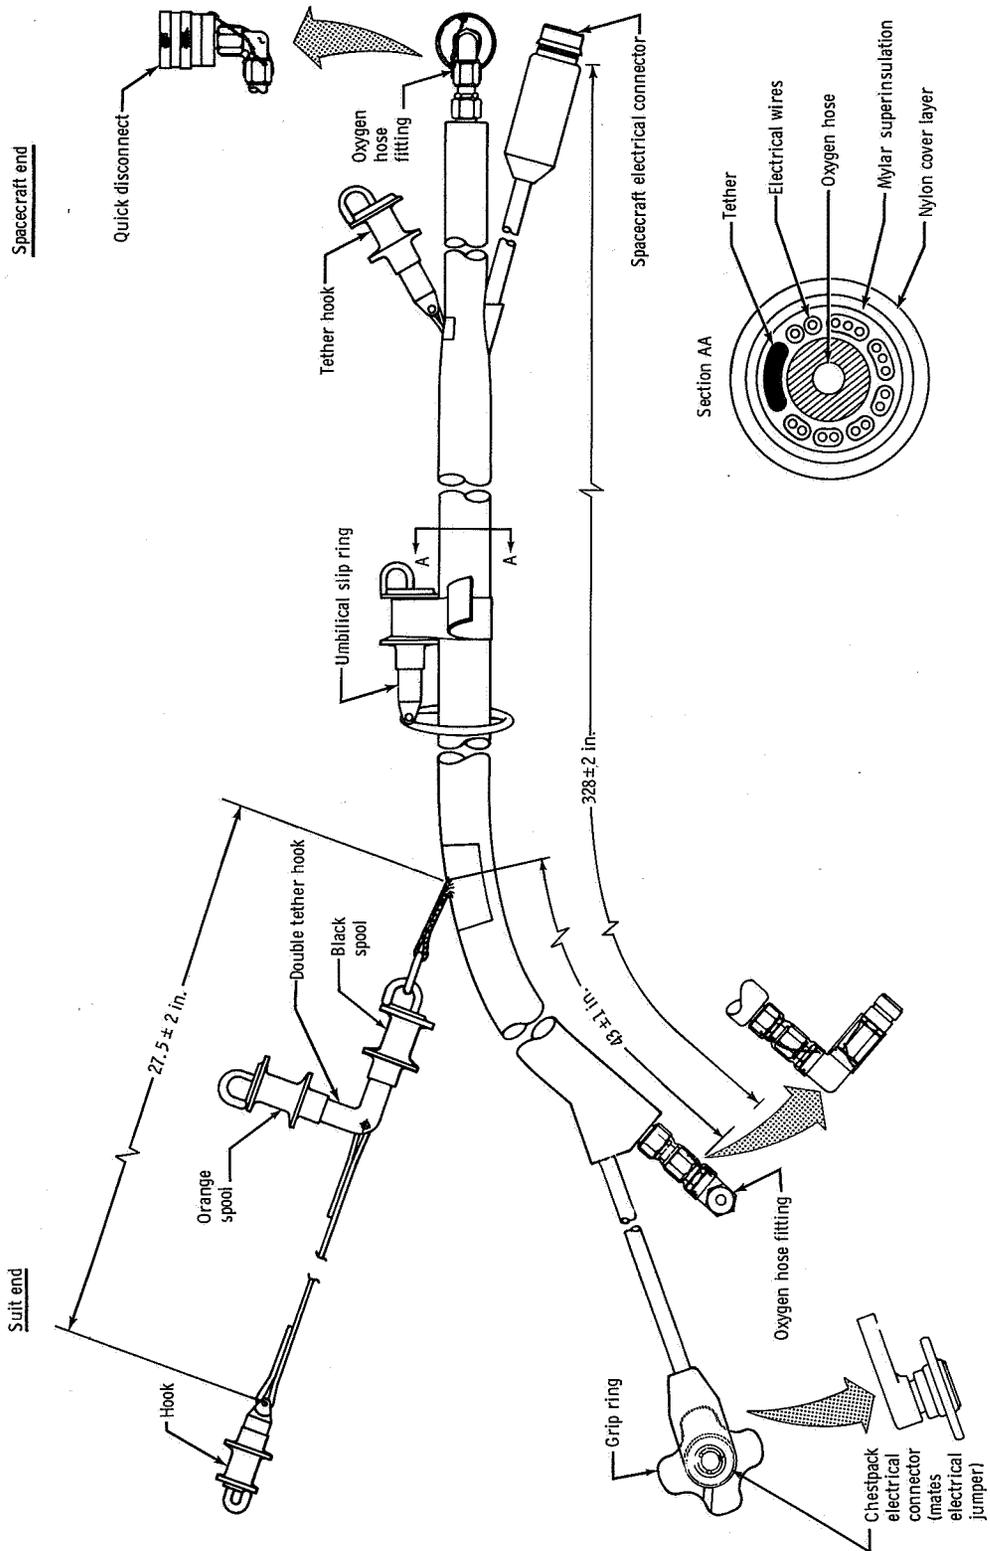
ELSS 25-foot umbilical used for Gemini VIII.
